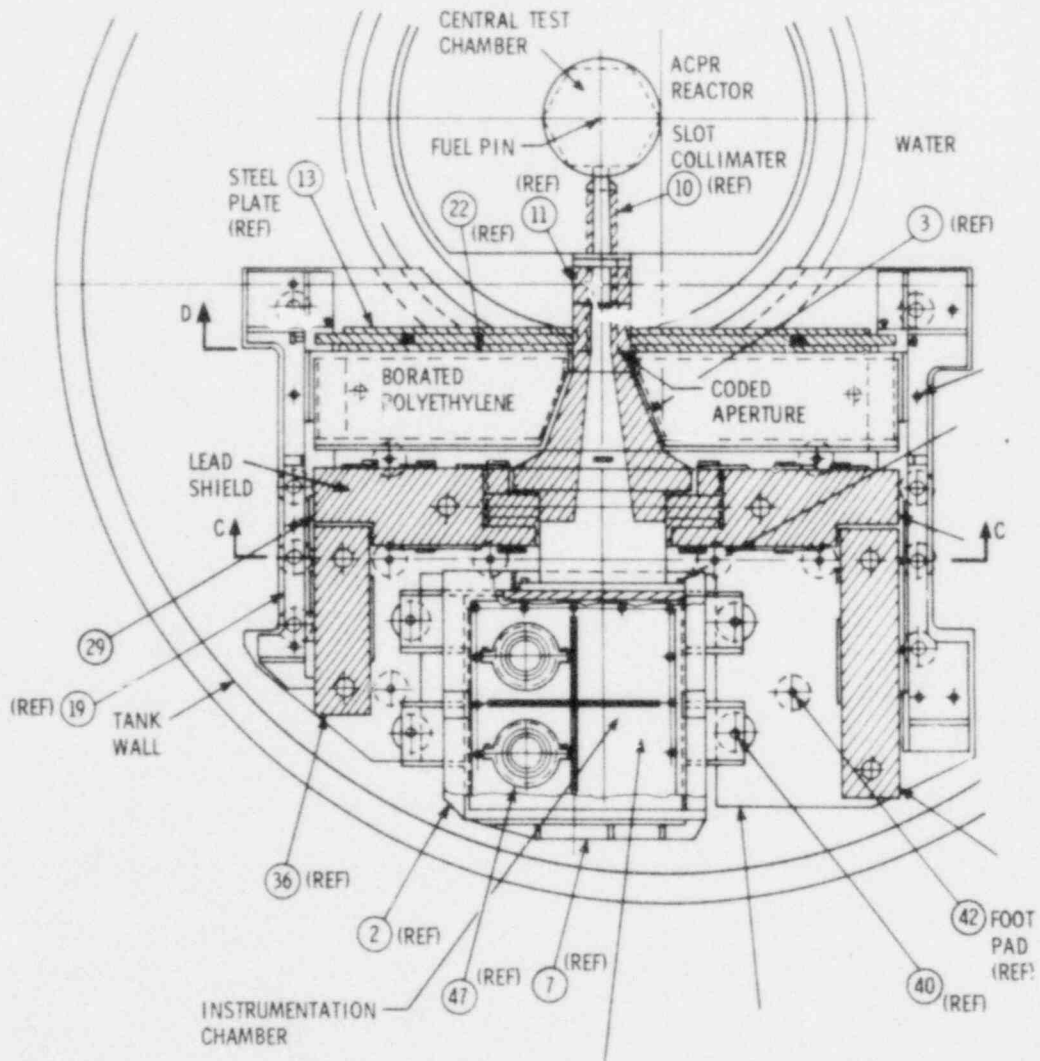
Horizontal Cross-Section Assembly Drawing of CAIS
